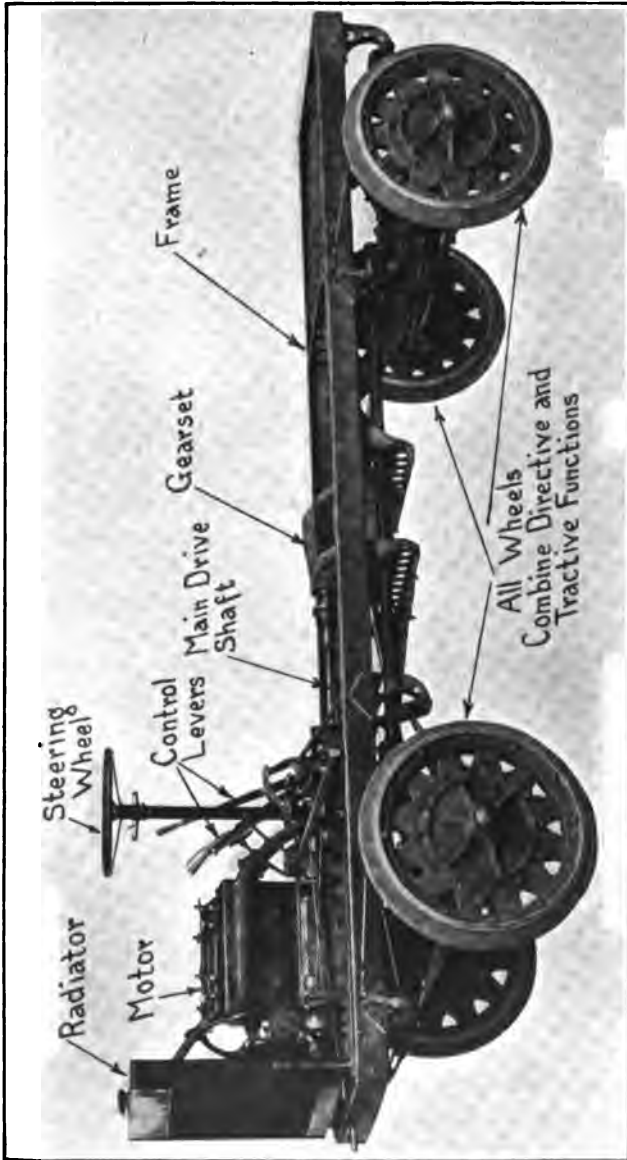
Showing location of power plant on the Jeffery four-wheel drive truck chassis.
